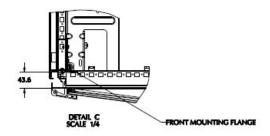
Internal dimensions – 2420, 4220, 4820 (leveling foot/minimum clearance)
